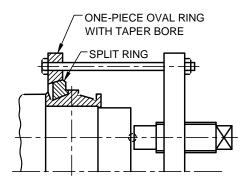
TOOL FOR WITHDRAWING A SELF-ALIGNING ROLLER BEARING
